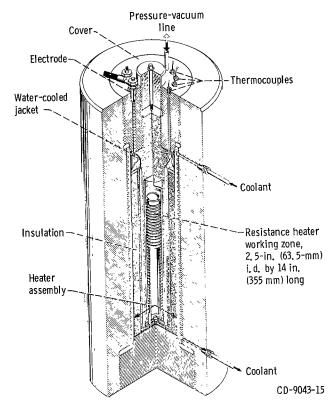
Cold-wall autoclave used for hot-isostatic-pressure welding.
